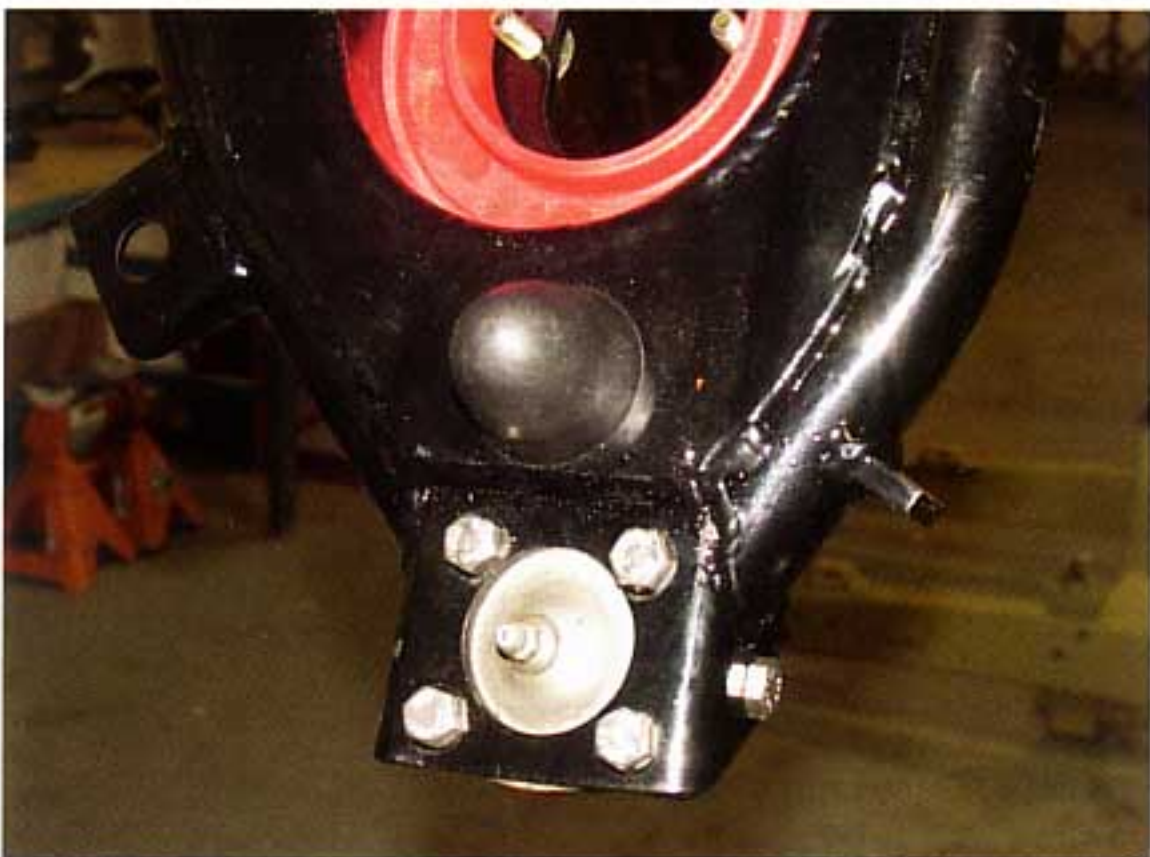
These arms are equipped with new ball joints that allow you to use stock spindles as well as any available dropped spindle design.
